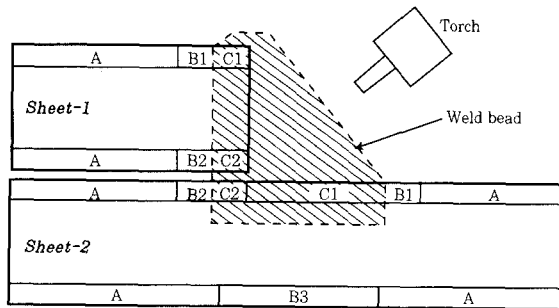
Classification of Zn-coated layer in lap-jointed fillet welds
